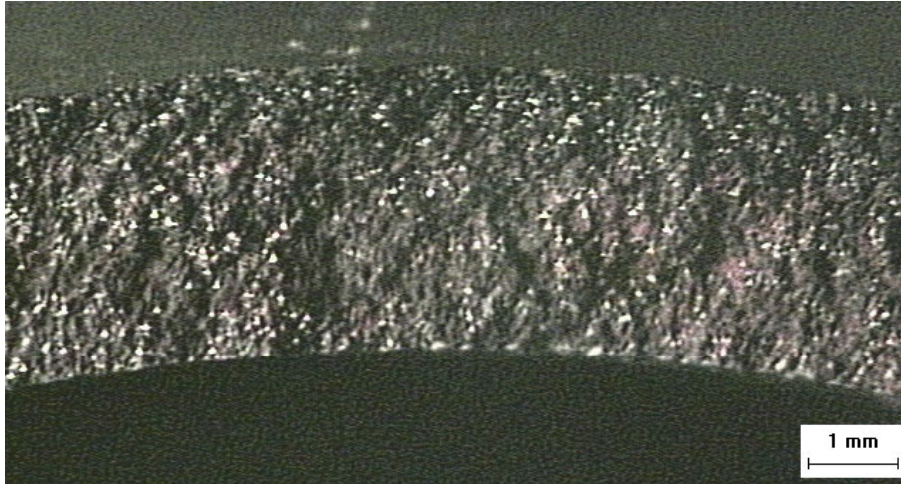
Surface fracture aspect on insert 1 observed by Stereoscopic Magnifying Glass.
